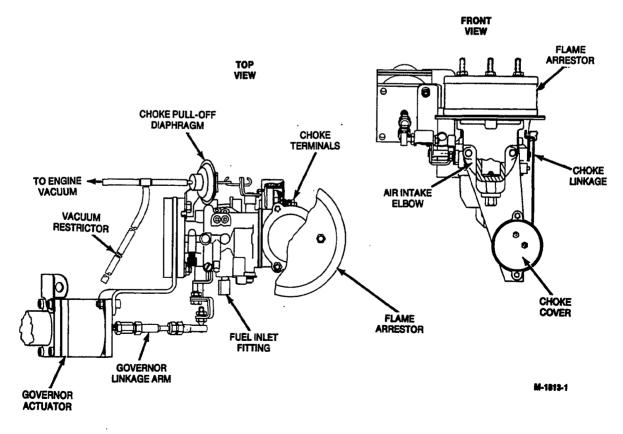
CARBURETOR ASSEMBLY, STARTING SPEC C
